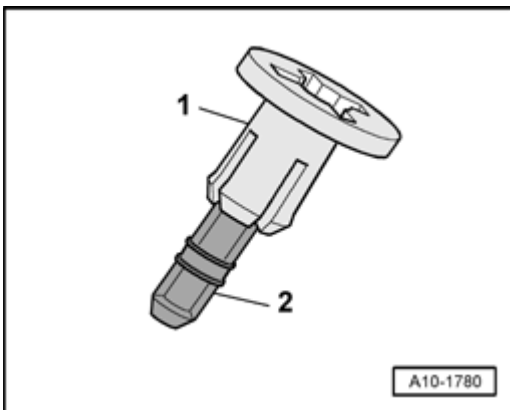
Identifying Fasteners At Lock Carrier & Pin
